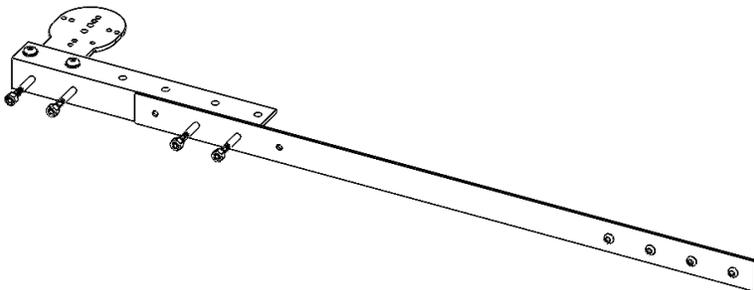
Inquire about other standard bracket sets, such as 17560 Assembly, POA Extension Arm, Panel Mount.
